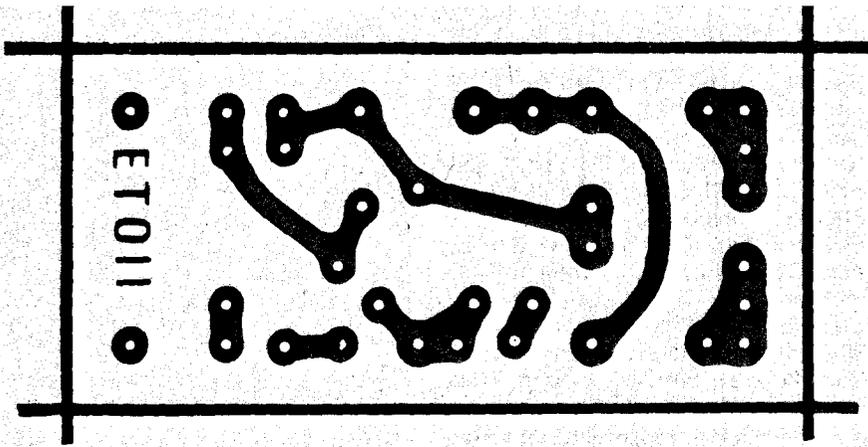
Foil pattern of the printed circuit board. Note that this is shown here exactly twice full size.
